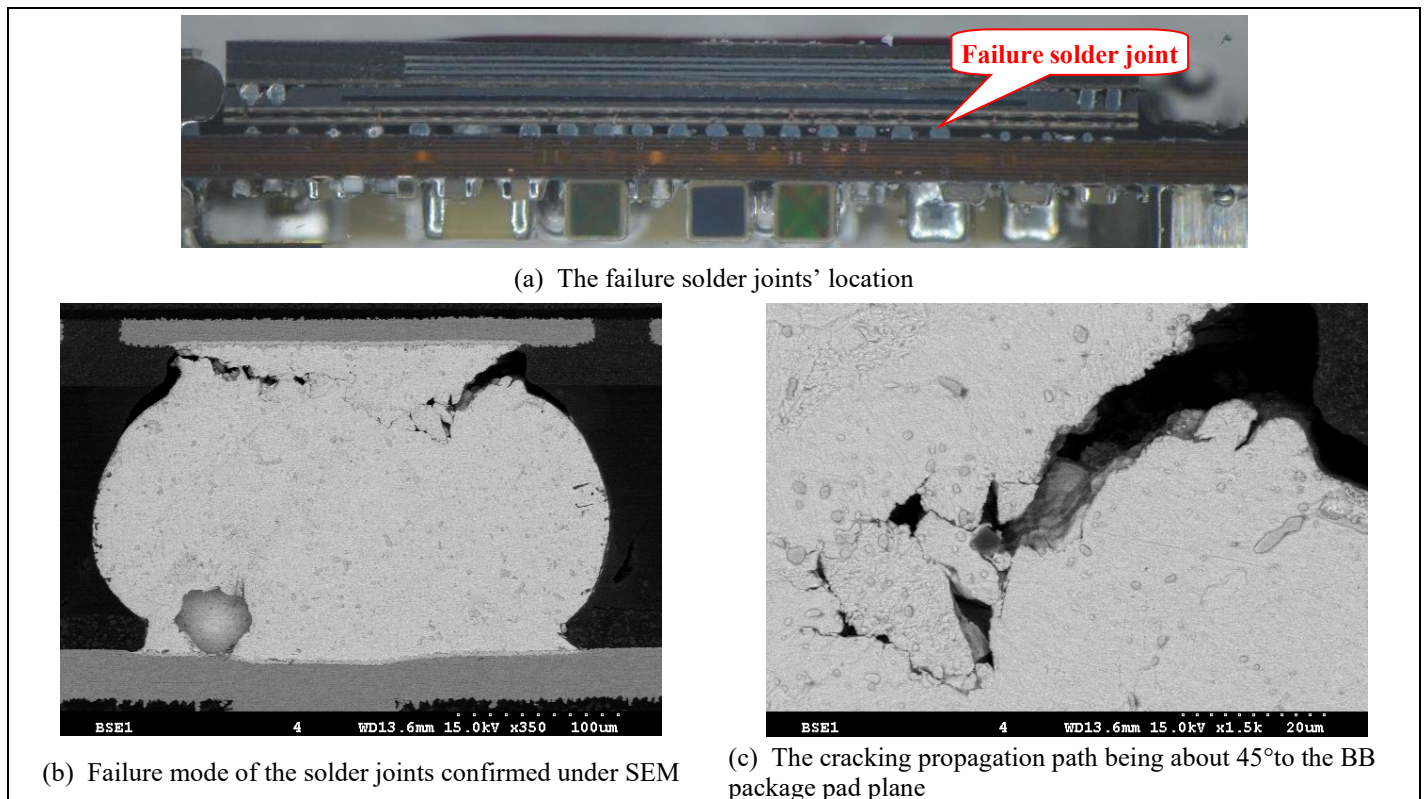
Micromorphology of some representative failure solder Joints
